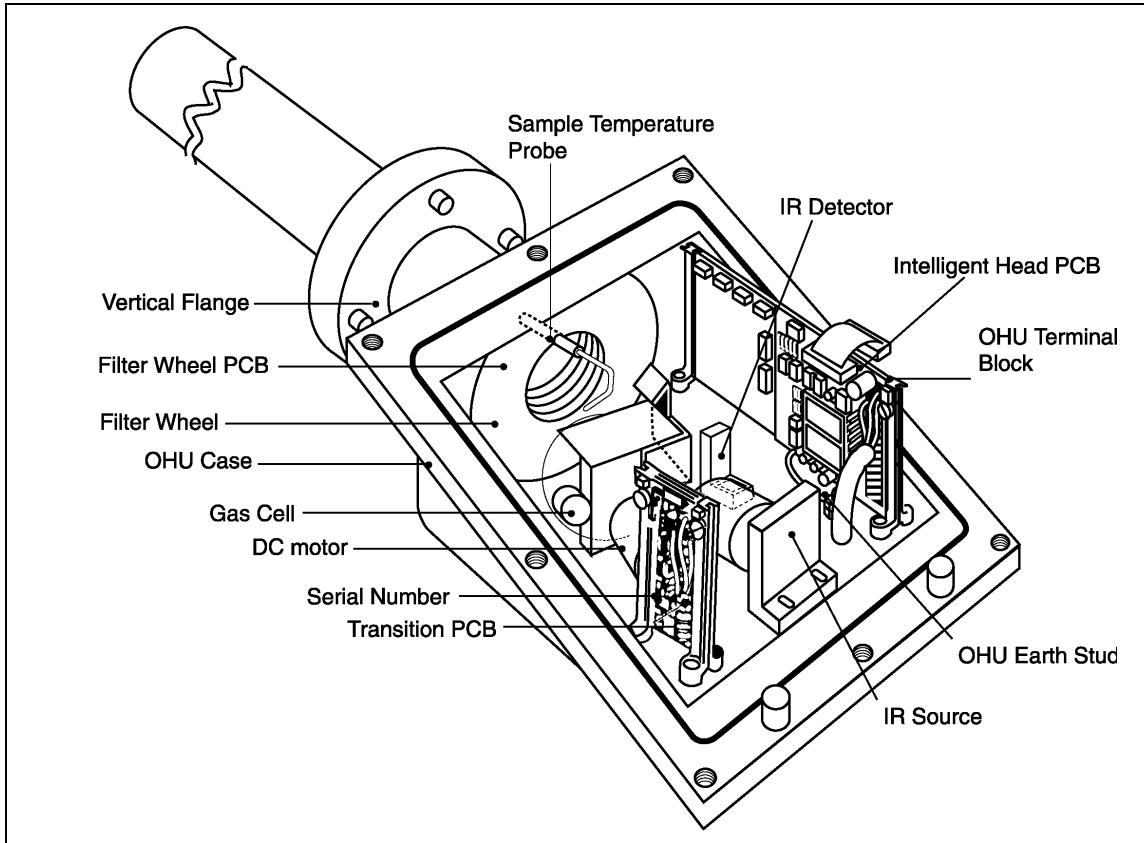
PULSI 200LR Optical Head Unit with cover removed
